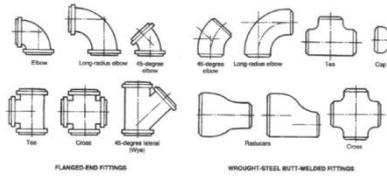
Flanged-End Fittings and Wrought Steel Butt-Welded Fittings
